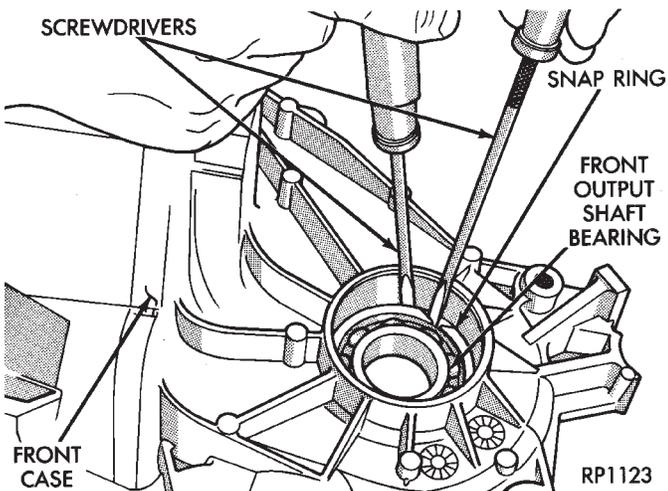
Removing/Installing Front Output Shaft Bearing Snap Ring
